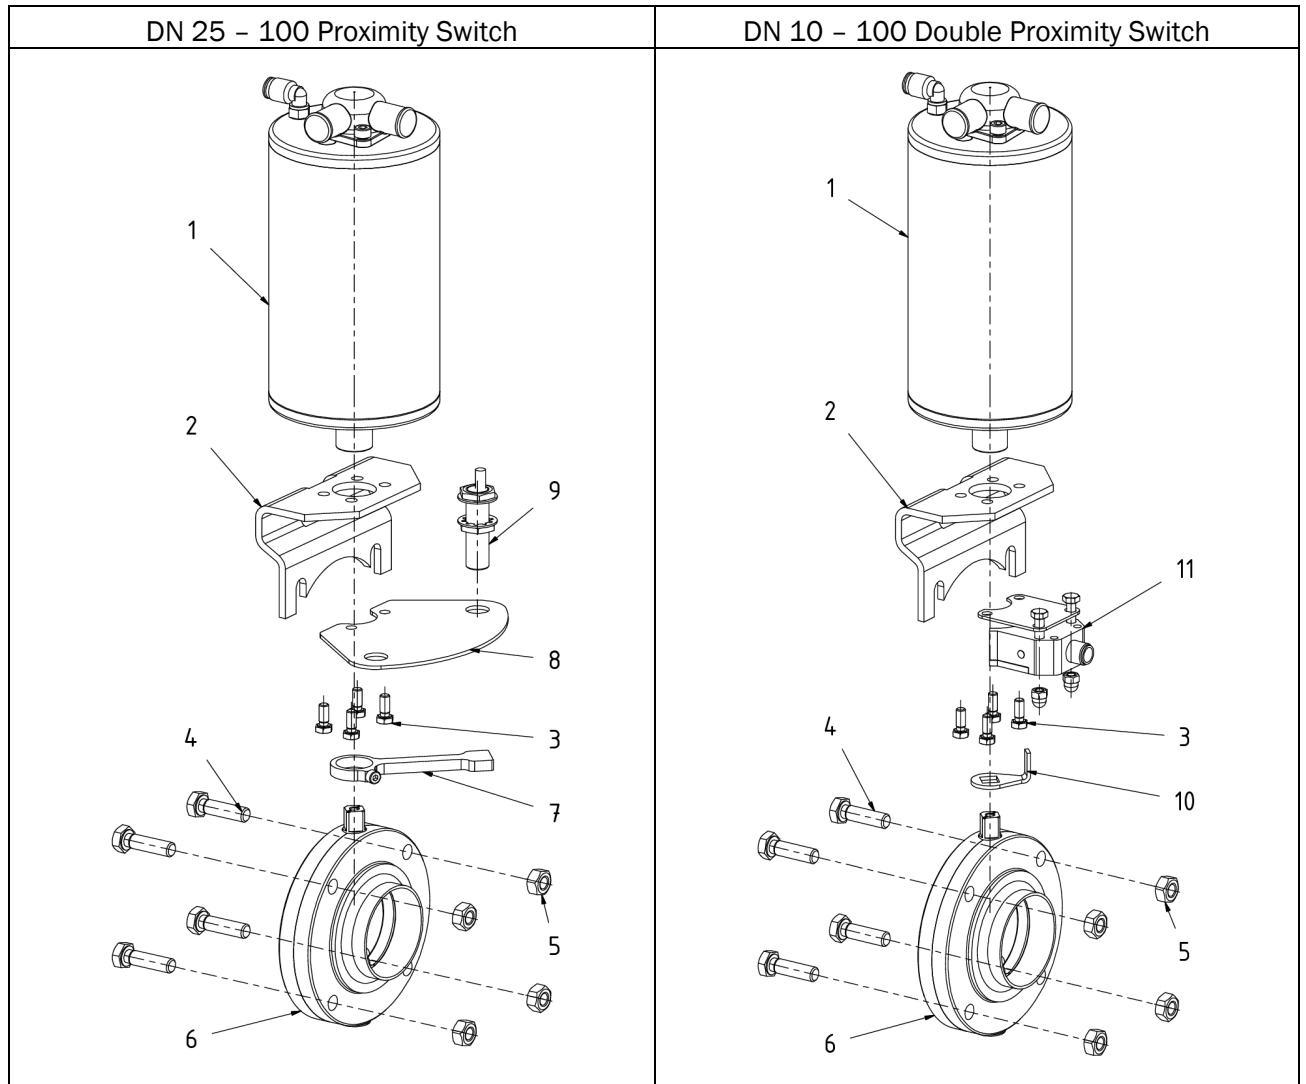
Component Layout of the Pneumatic Actuator with Feedback
